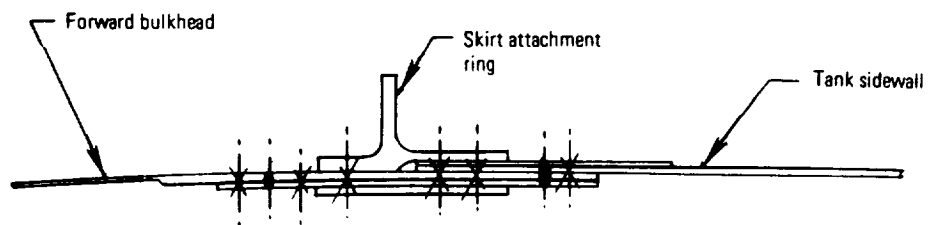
Example of bulkhead/sidewall juncture used in Centaur.
